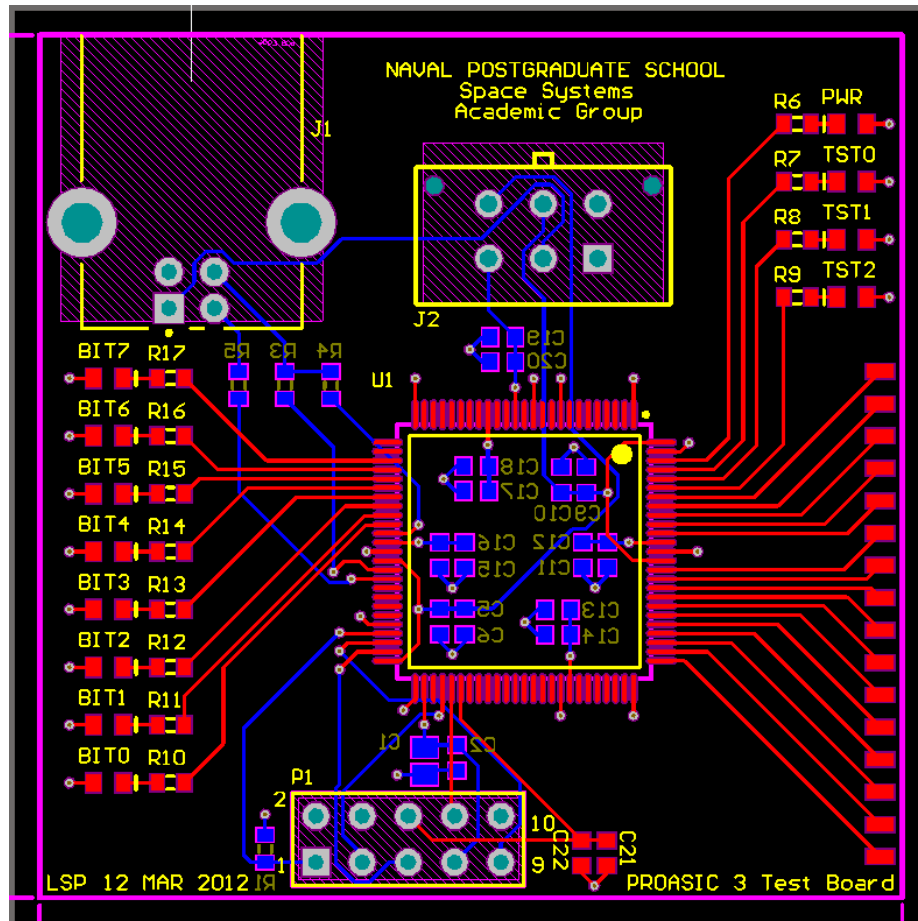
ProASIC3 Test Board 2-D PCB layout with all component footprints, signal lines, and vias visible.
